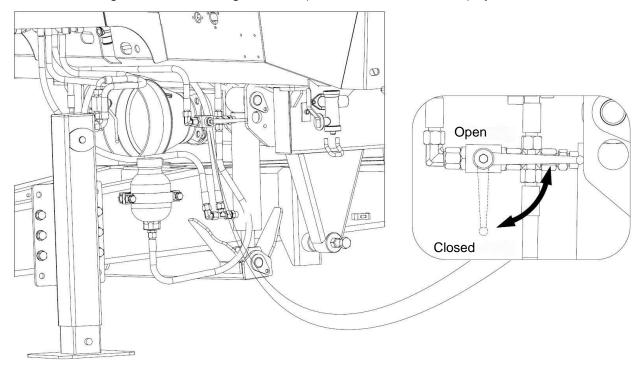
Hydraulic valve for controlling (shutting off) the drawbar shock absorber
